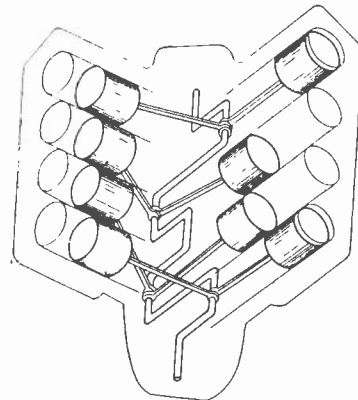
Diagram showing the type of crank shaft and arrangement of pistons used with V-type, eight-cylinder engines.
